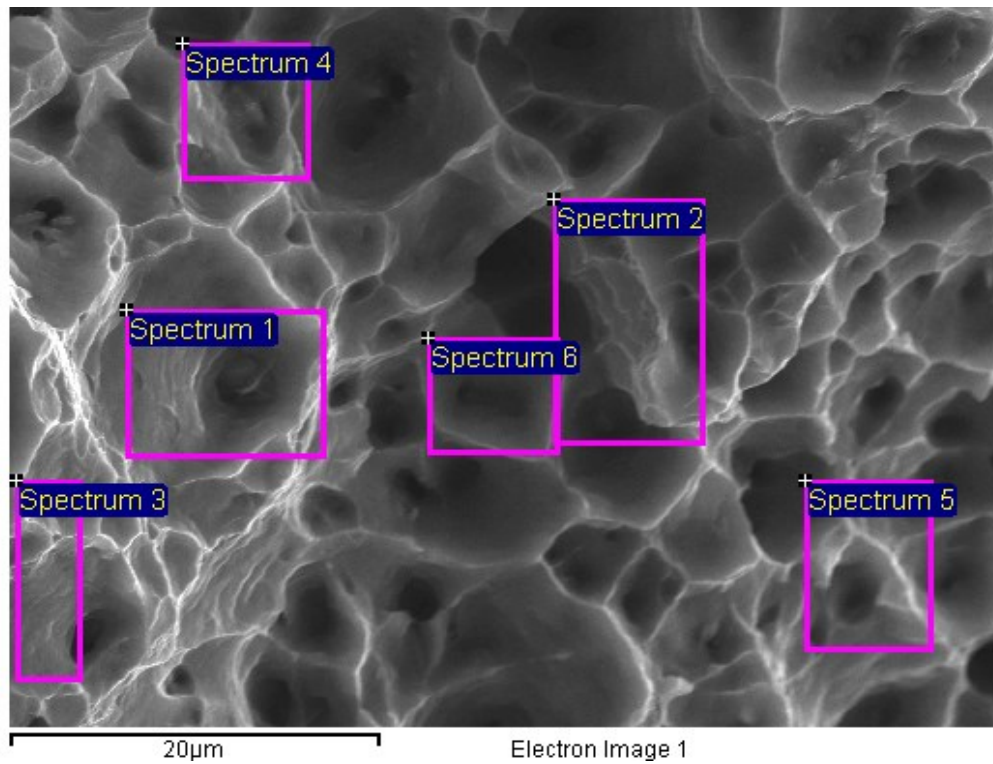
Fracture surface of the sample with UFG structure.
